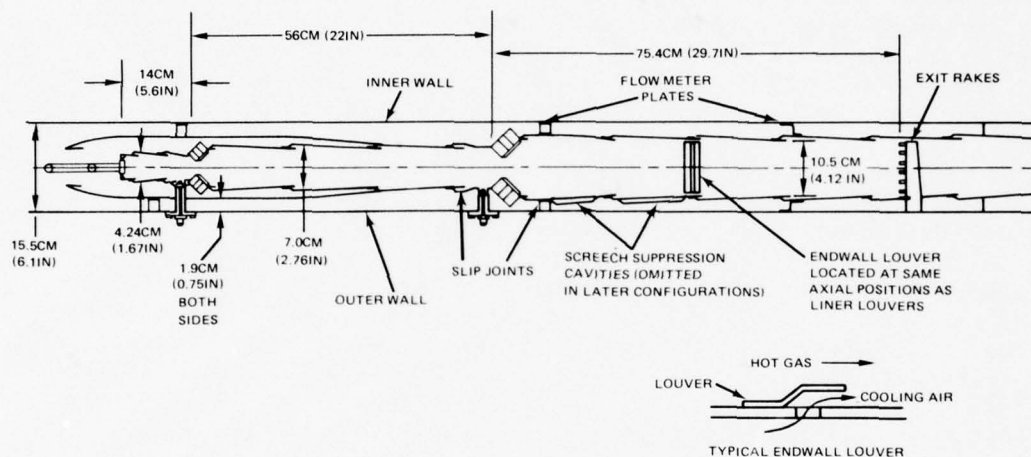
Dimensions of the VCE Segment Duct Burner Rig
